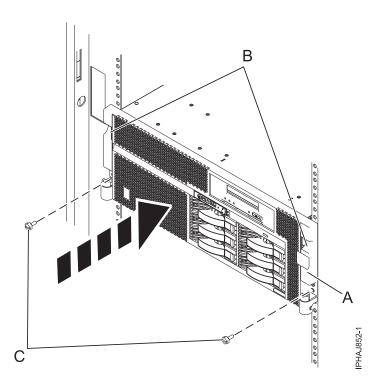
Pushing the system into the rack and attaching the thumbscrews
